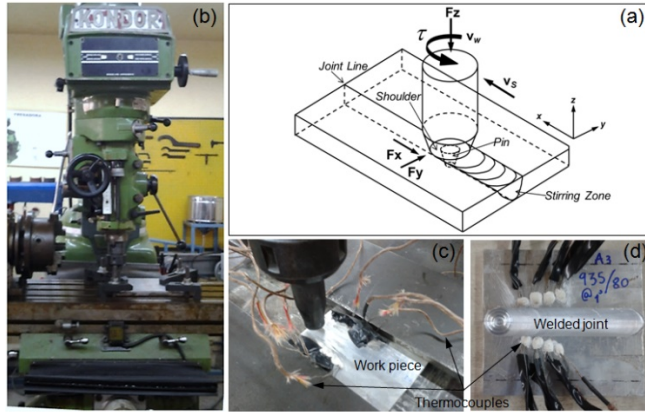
Experimental setup used. (a) Sketch of parameters and parts of friction stir welded joint. (b) Set up and mill machine used. (c) Experimental setup for thermal cycle measurements. (d) Thermocouples disposition on welded plate.
